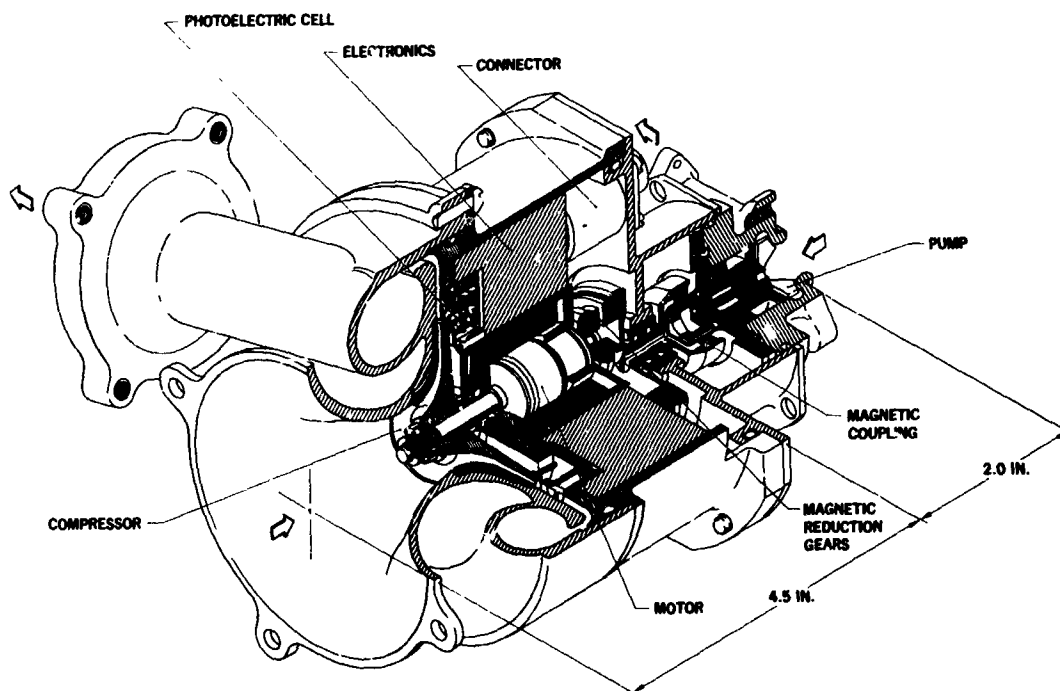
Complete PECS Machine Including Magnetic Reduction Gear and Coupling
